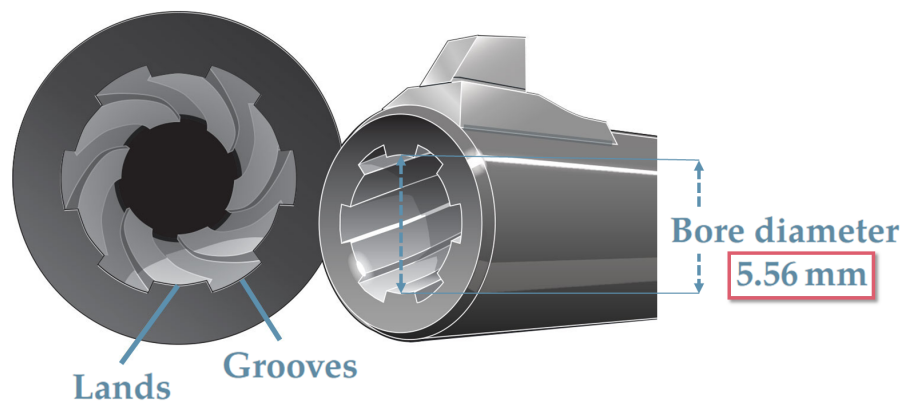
Close-up view of barrel rifling showing the barrel bore diameter (5.56 mm) [42].
